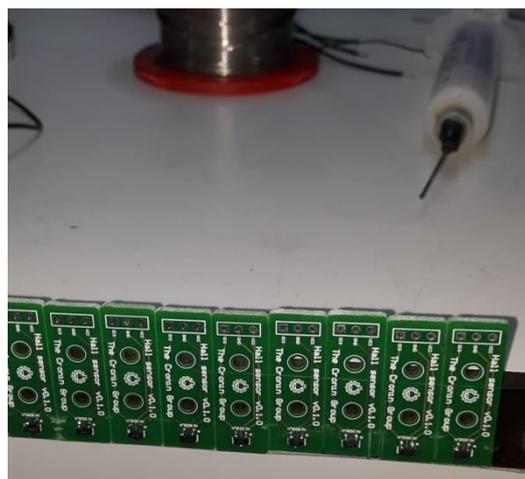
Hall sensor boards attached to the table edge, ready for soldering the connecting wires.
